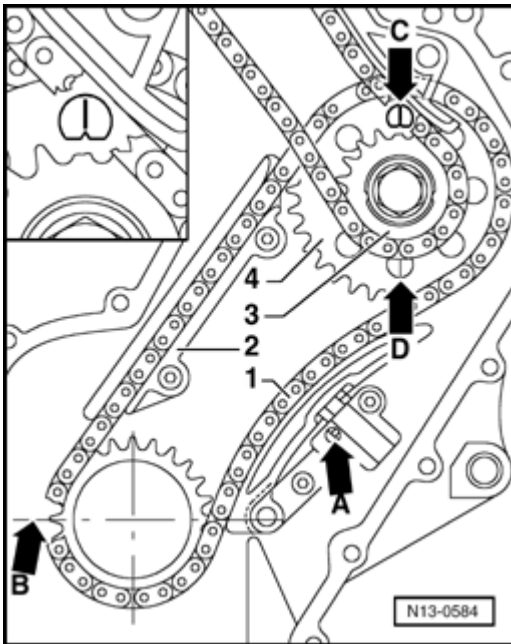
Identifying Guide Rail, Roller Chain, Both Chain Sprockets, And Marking On Roller Chain Sprocket Aligned With Notch On Thrust Washer Of Intermediate Shaft
